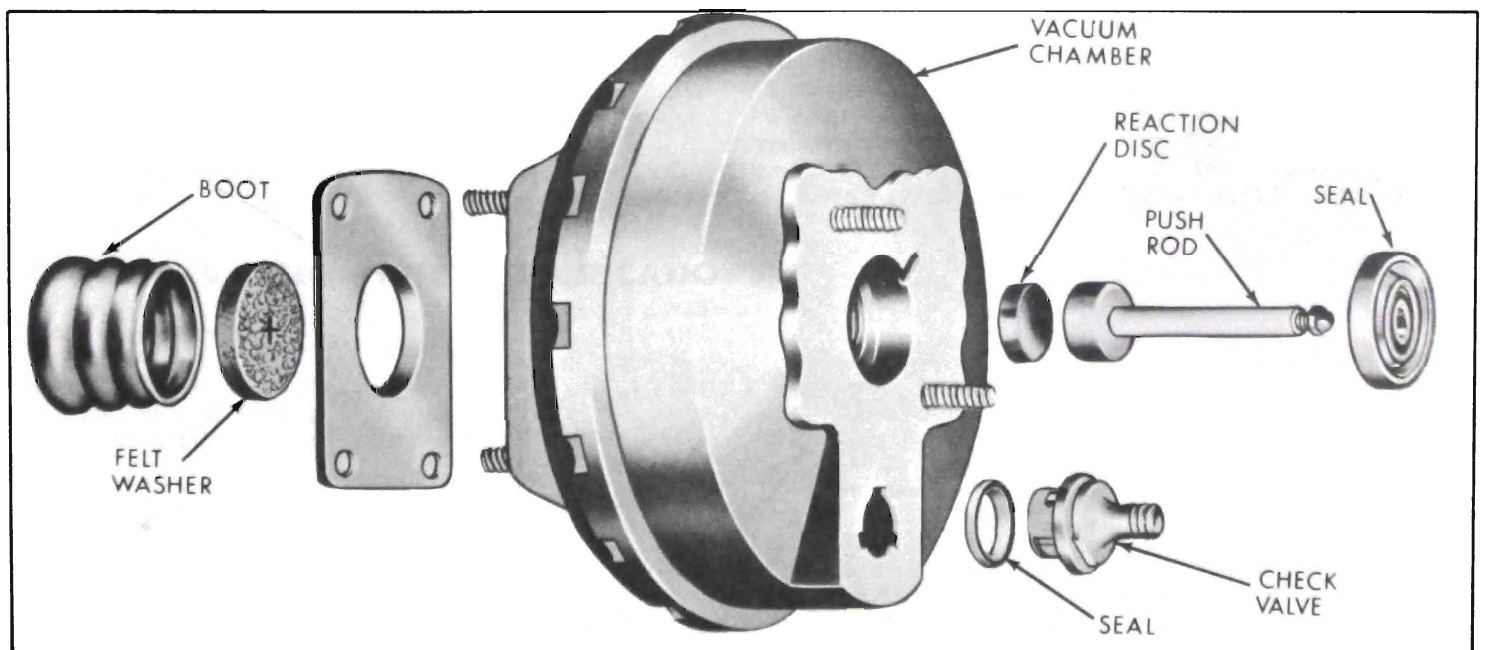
Assembly of Reaction Disc, Push Rod and Seal, Check Valve, Retainer Plate, Washer and Boot
